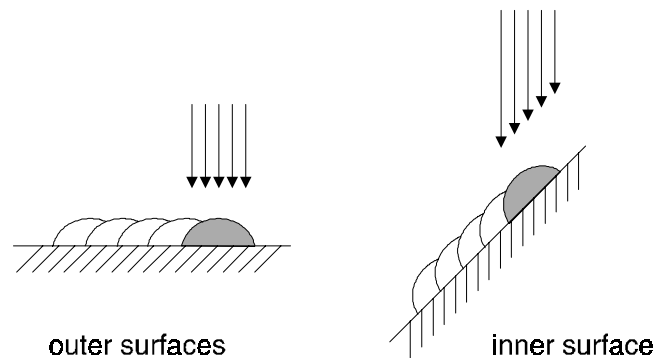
Positioning of the surfaces with respect to the laser beam.
